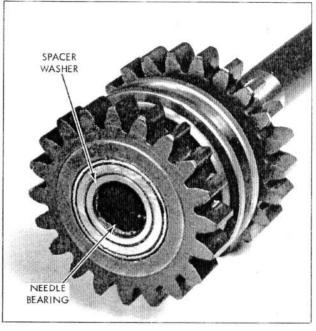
Needle Bearings Properly Installed in Input Shaft
